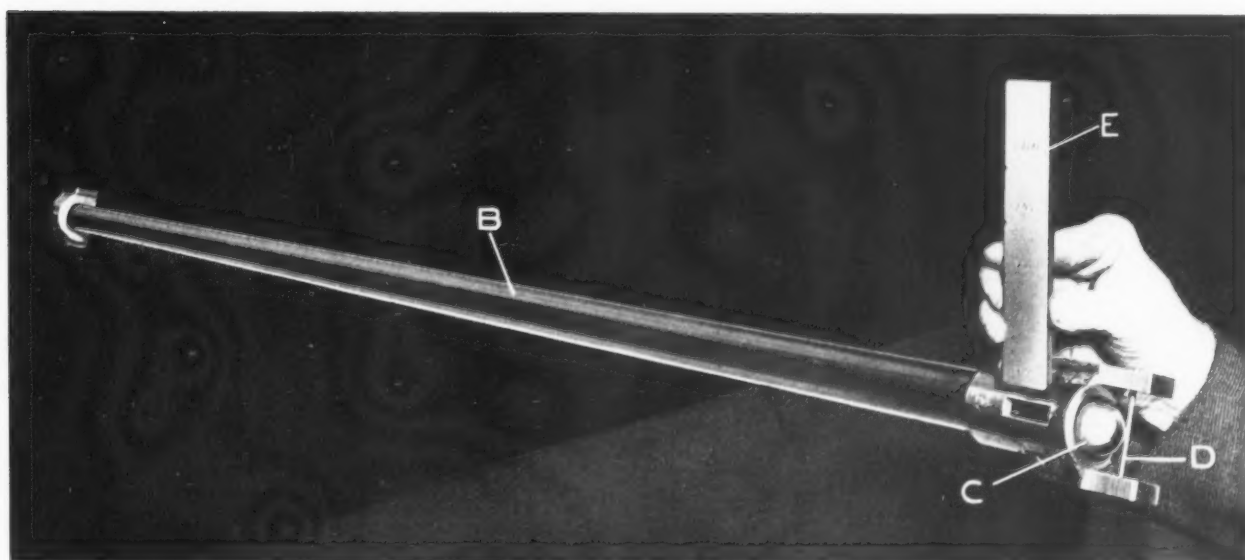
Method of Using Floating Type Gage in Checking Diameter of Ball Race in Gun Turret
